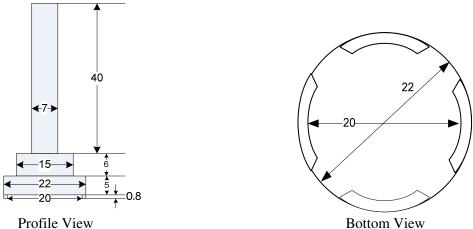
Pullout Stub Dimensions (mm) for Bitumen Bond Strength Test
